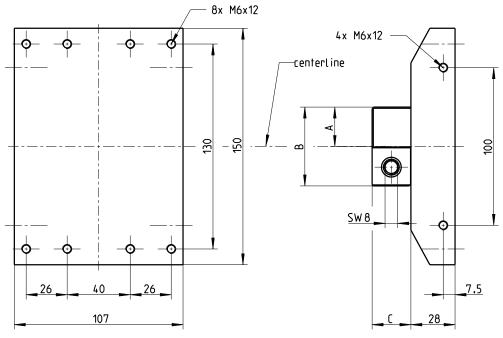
Machine adapter with clamping wedge for disk-type turrets with direct tool holding fixture, Type 9129AD...
